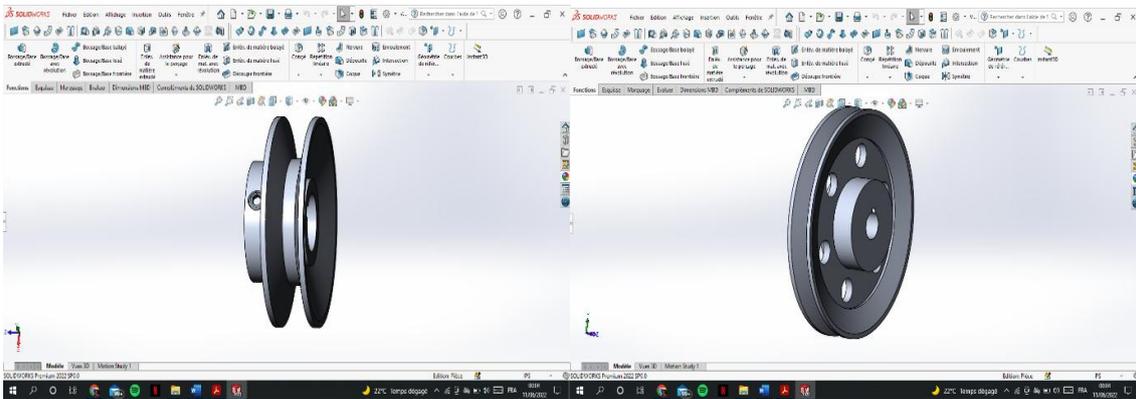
3D design of the driving and driven pulley (80mm) & (160mm)
